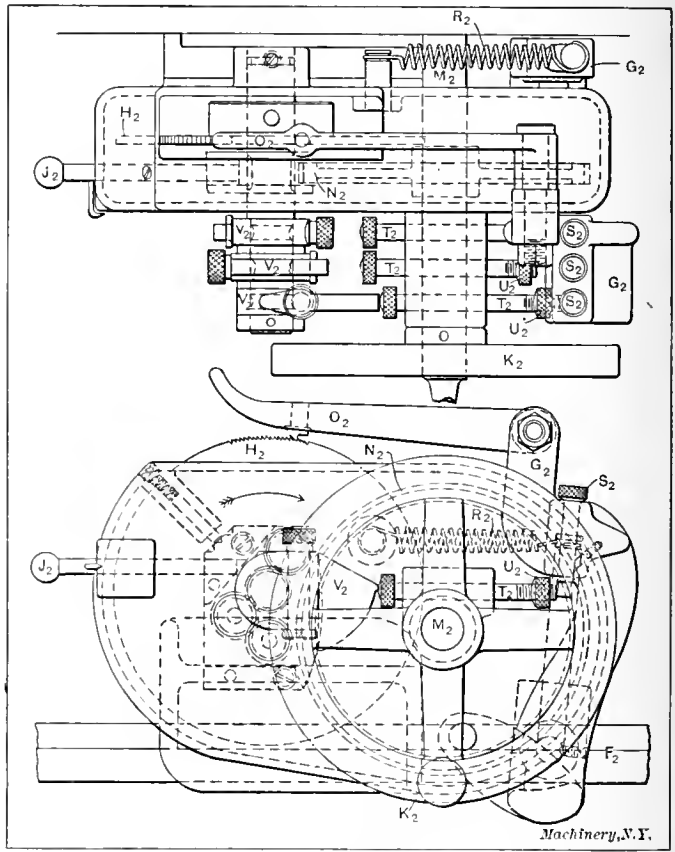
The Cross-feed Mechanism, with Automatic Diminishing Device and Stop
